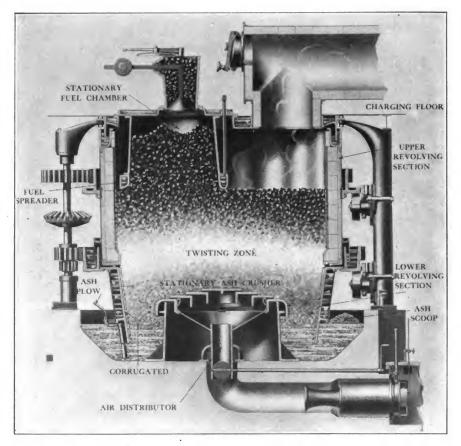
SECTIONAL VIEW OF THE ROTARY GAS PRODUCER, SHOWING ITS OPERATION AND ACTION CLEARLY
